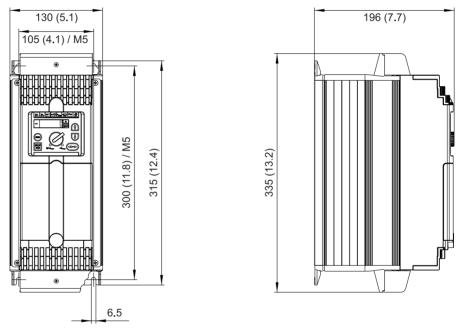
Dimensions, MOVITRAC[®] 07 size 2
